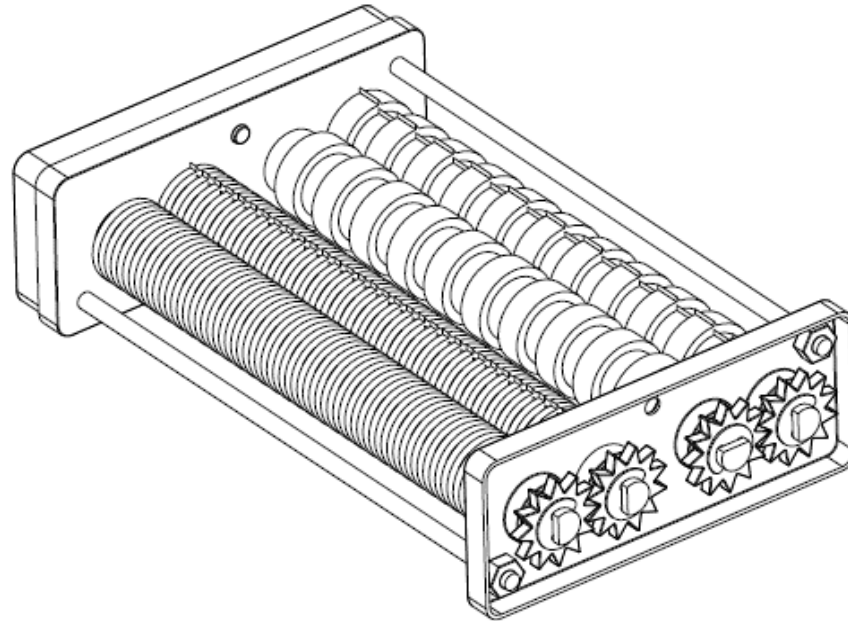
Isometric view showing the assembly of gears and cutting shafts
